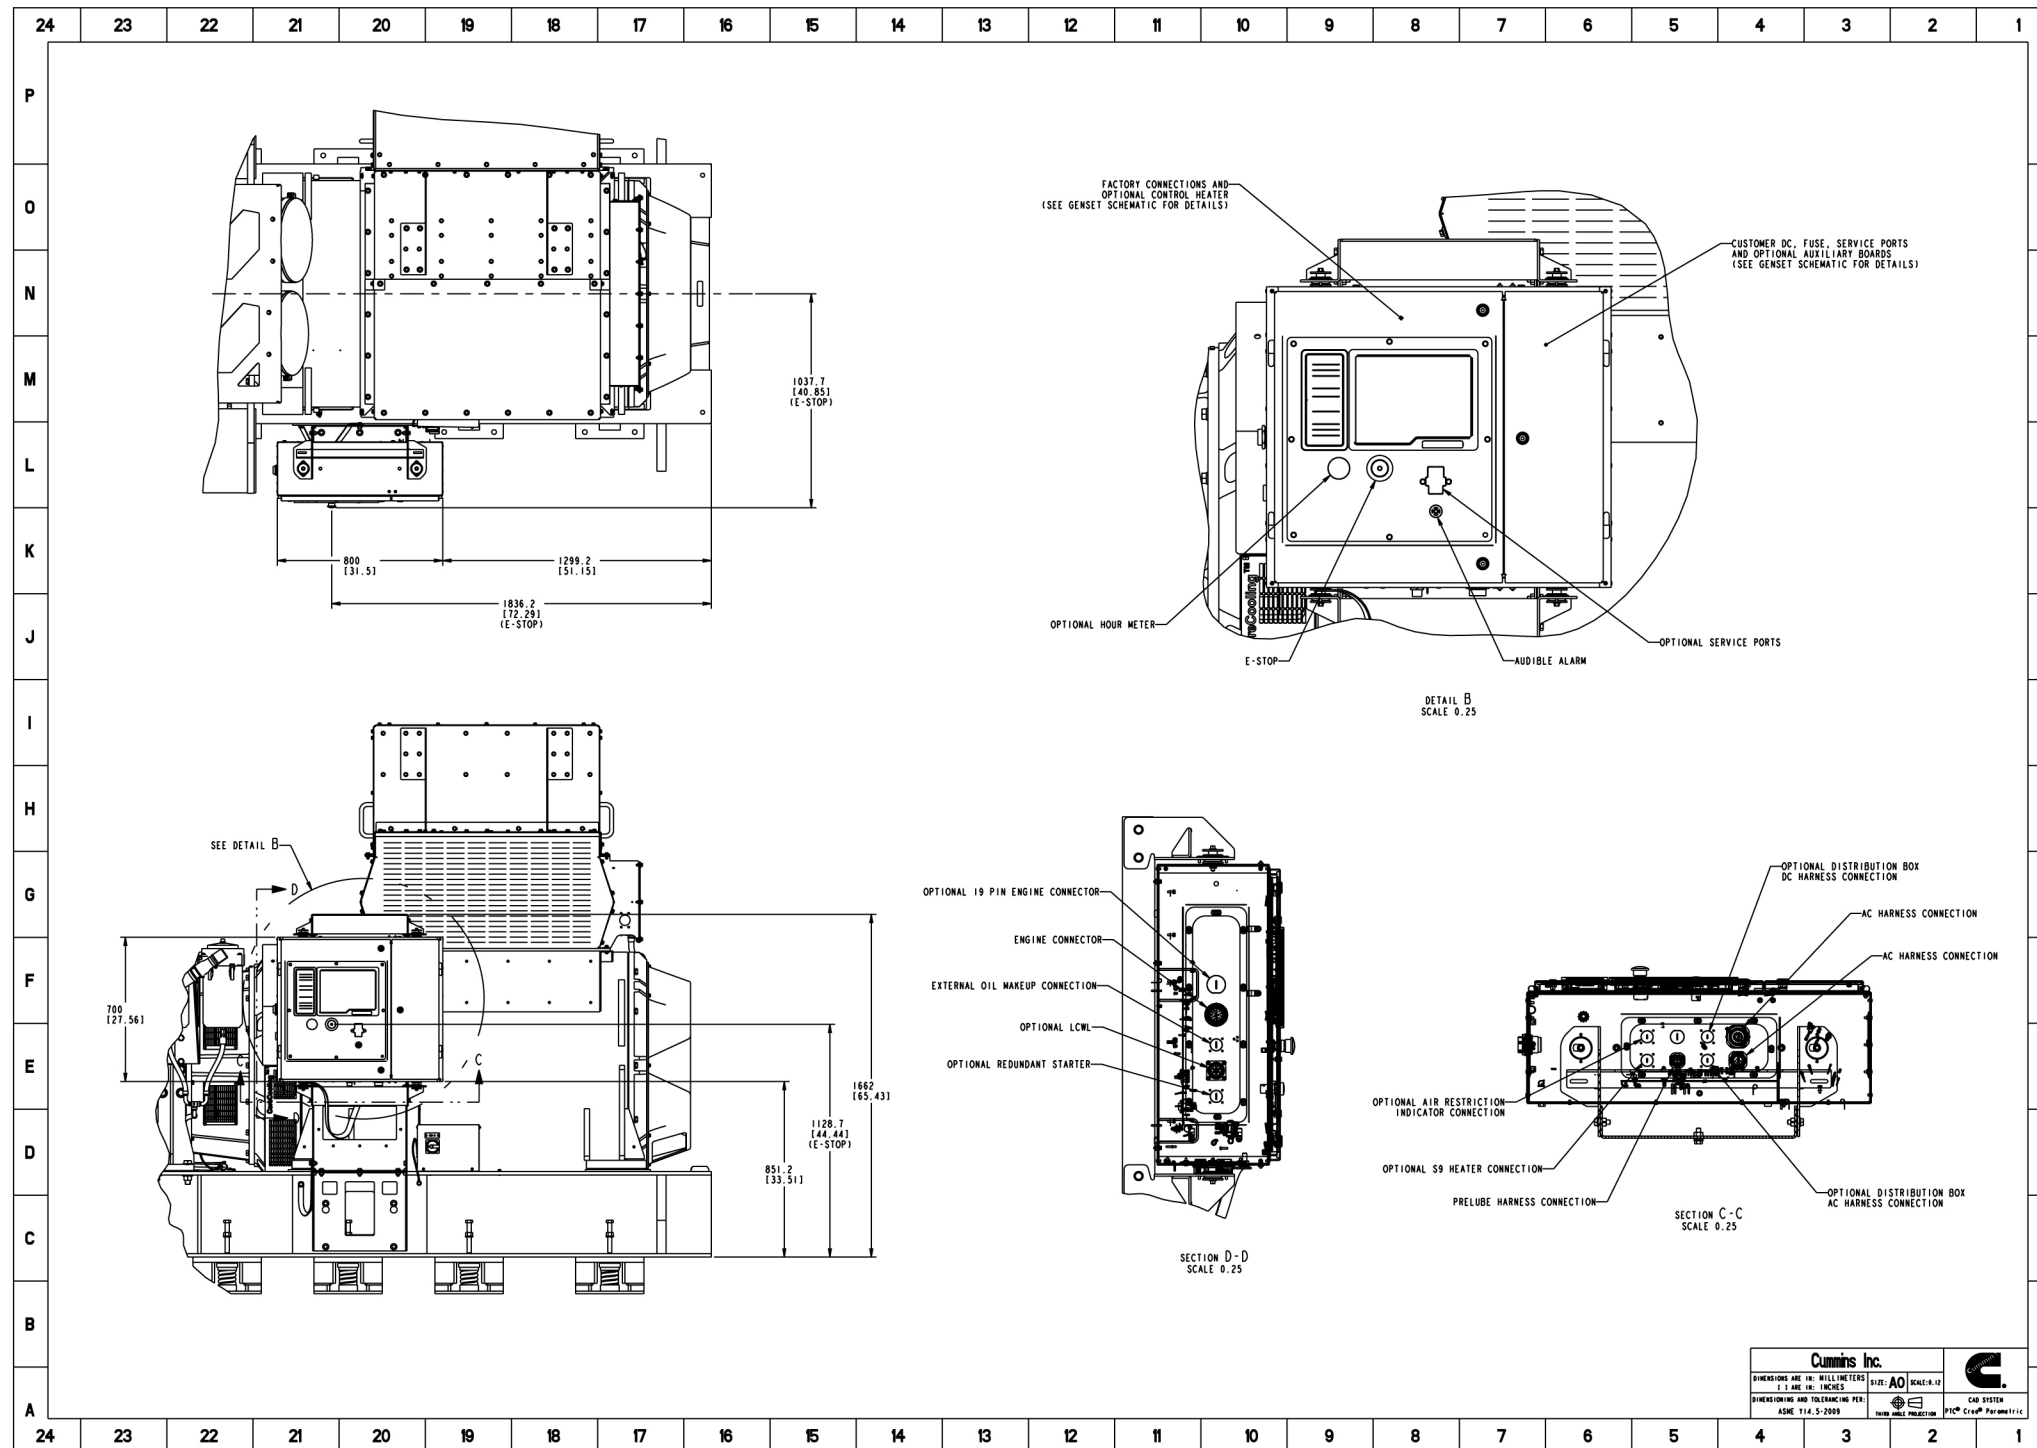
OUTLINE DRAWING (SHEET 6 OF 8)
